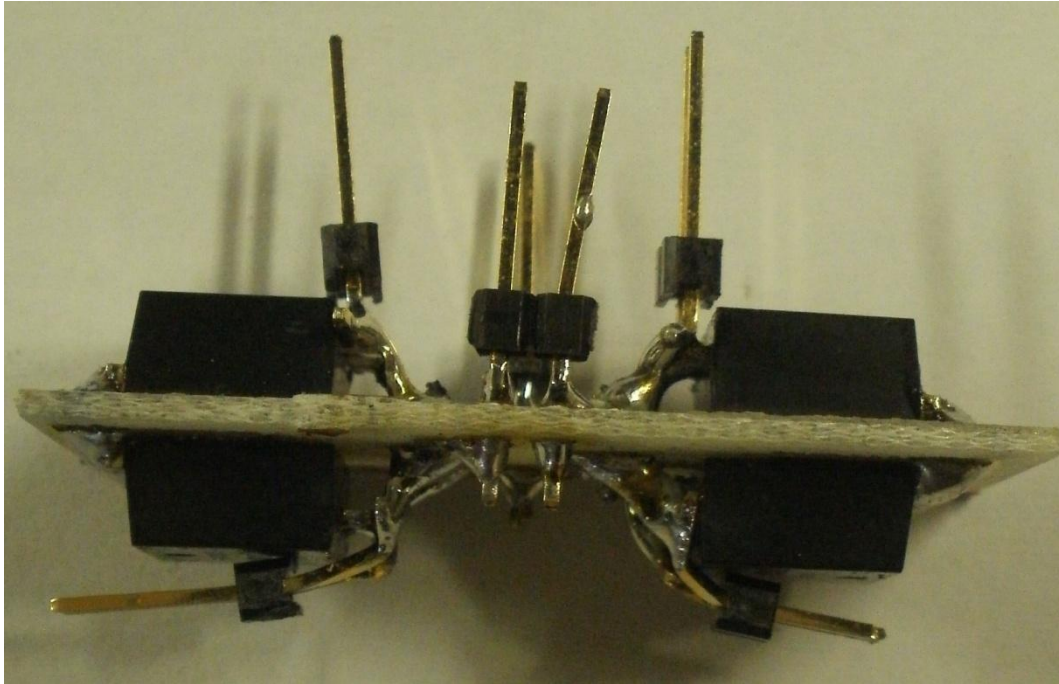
Side view of Device Under Test 4 PCB (Geometrically Symmetrical – Rotated View)
